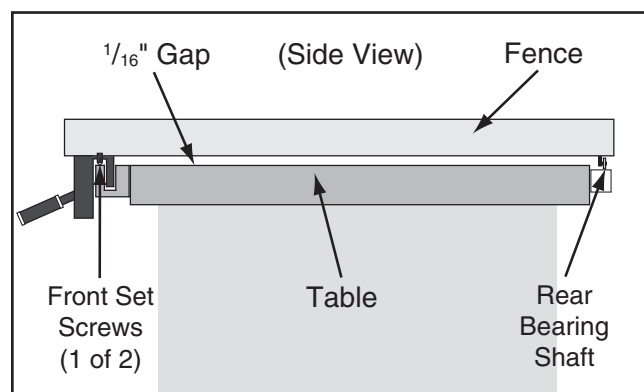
Fence height is adjusted by two front set screws and rear bearing shaft.
